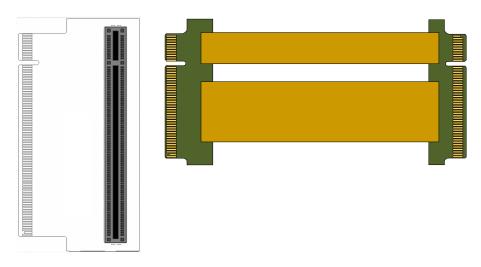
PCIe Male-to-Male x8 Cable Assembly - Side
